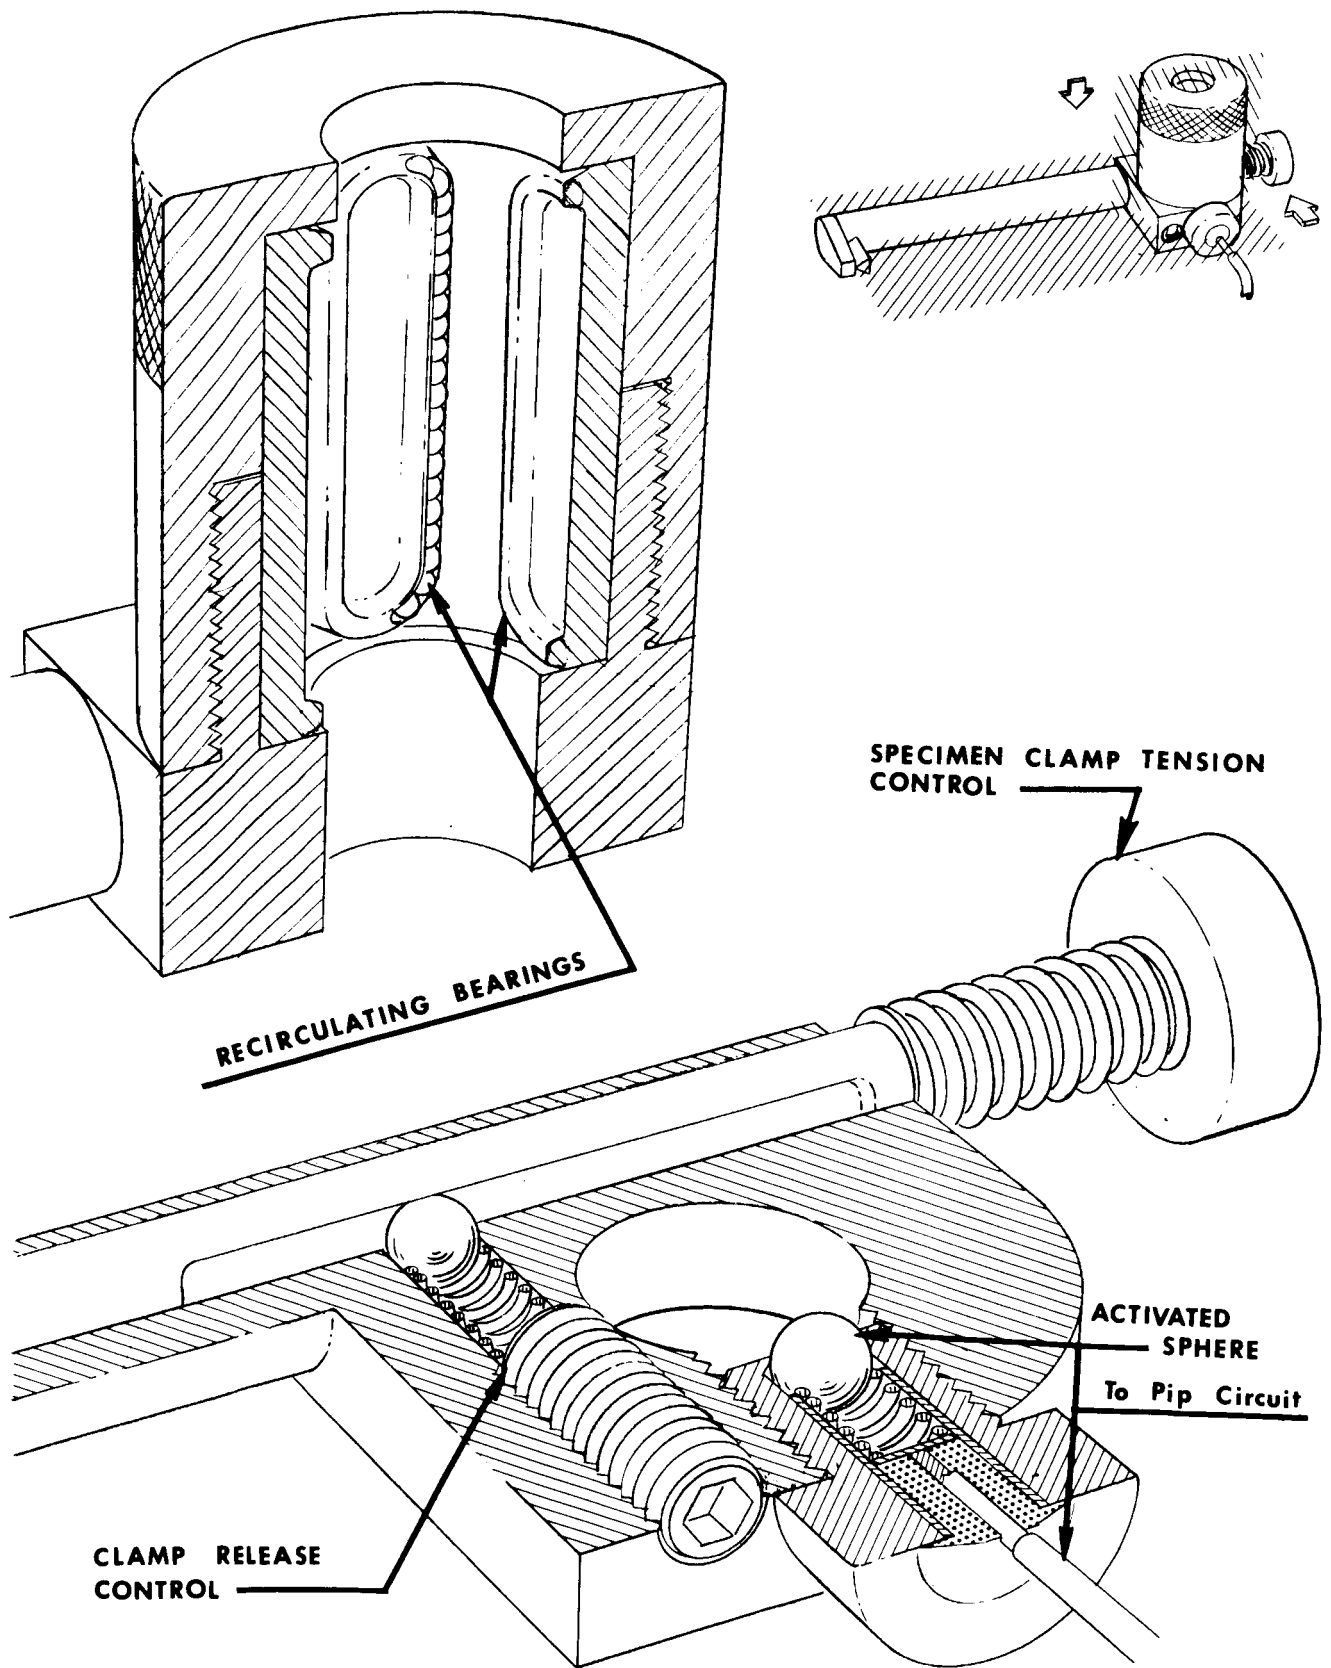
LOWER CLAMP BEARING AND SPRING ASSEMBLY (ARTIST'S DRAWING)
